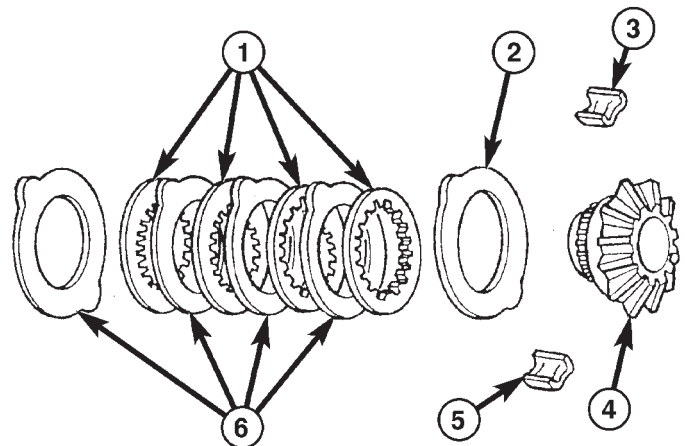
SIDE GEARS AND CLUTCH DISCS
